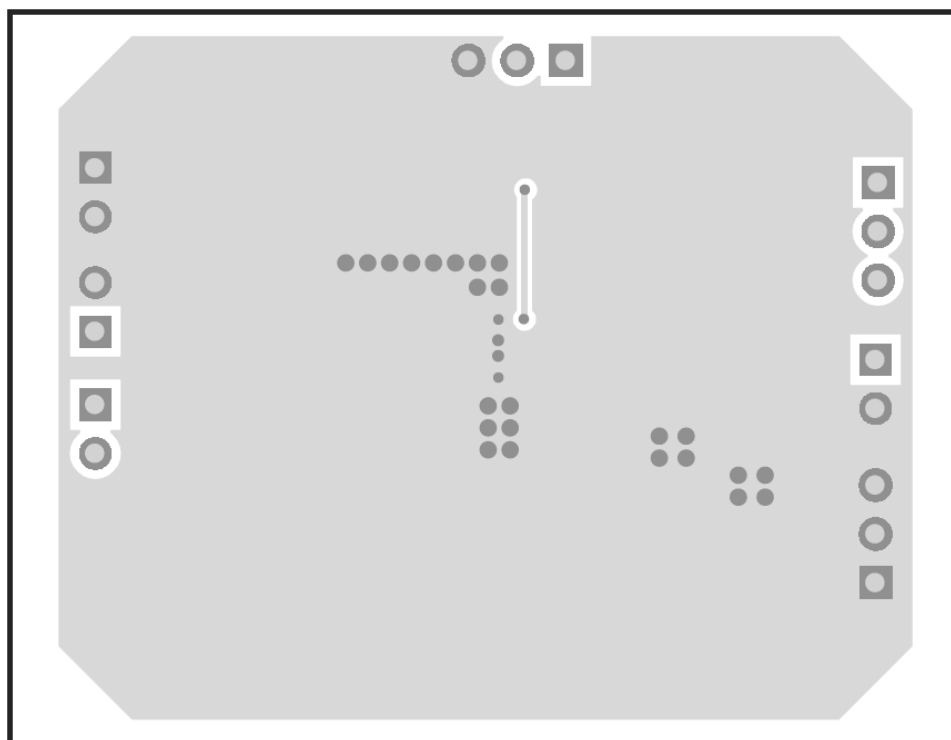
TPS61021EVM-723 Bottom-Side Layout
